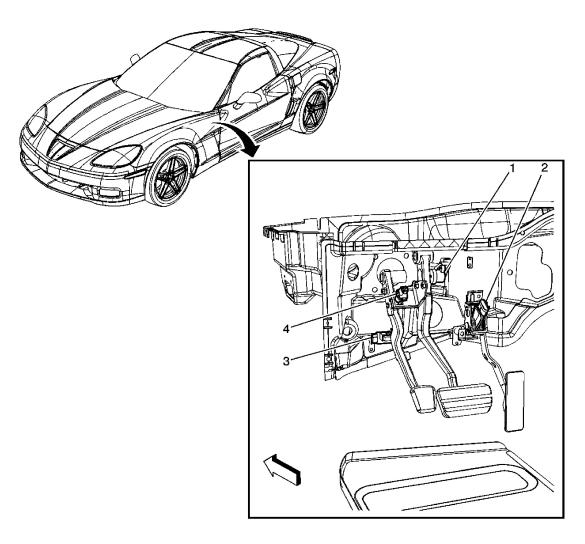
Lower Left Side of I/P Courtesy of GENERAL MOTORS CORP.
